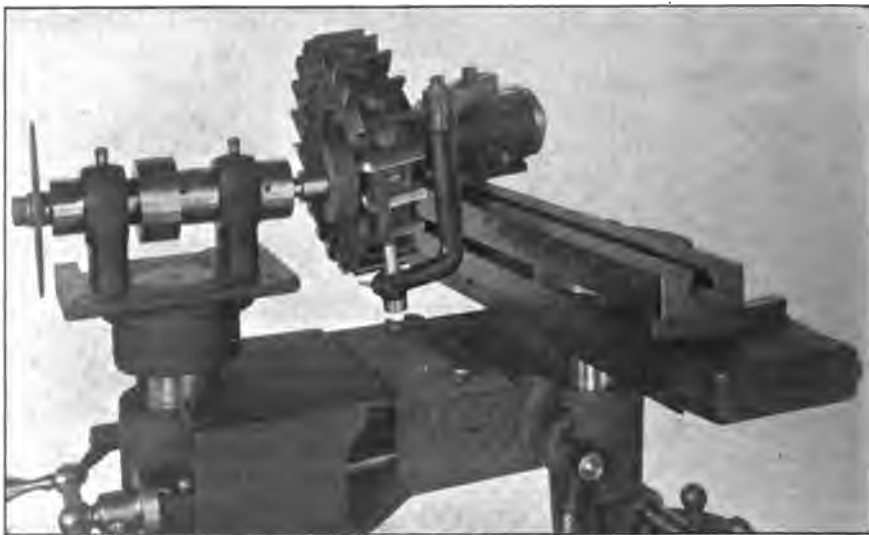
Customarily the cutter is held by hand against a guide. Especially when used in taking finishing cuts, it is better that the cutter be held in place mechanically.
